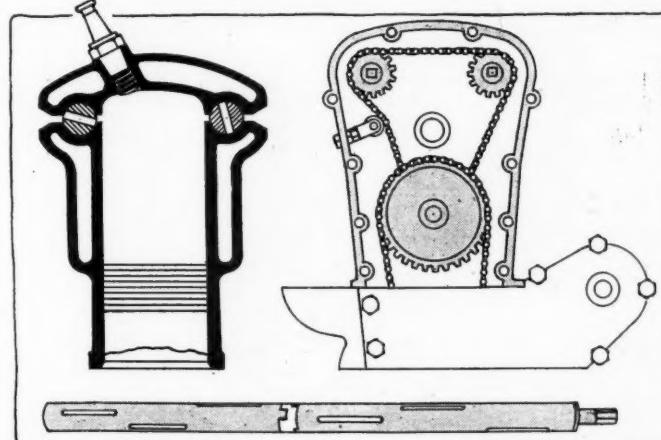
Left, vertical section through Mead Speedwell rotary valve motor, showing position of the sleeves when the intake is open. Right, a double reduction silent chain drive is used for operating the valves. The idler roller gives adjustment for wear. Bottom, valve sleeve, showing slots through which the gas passes
